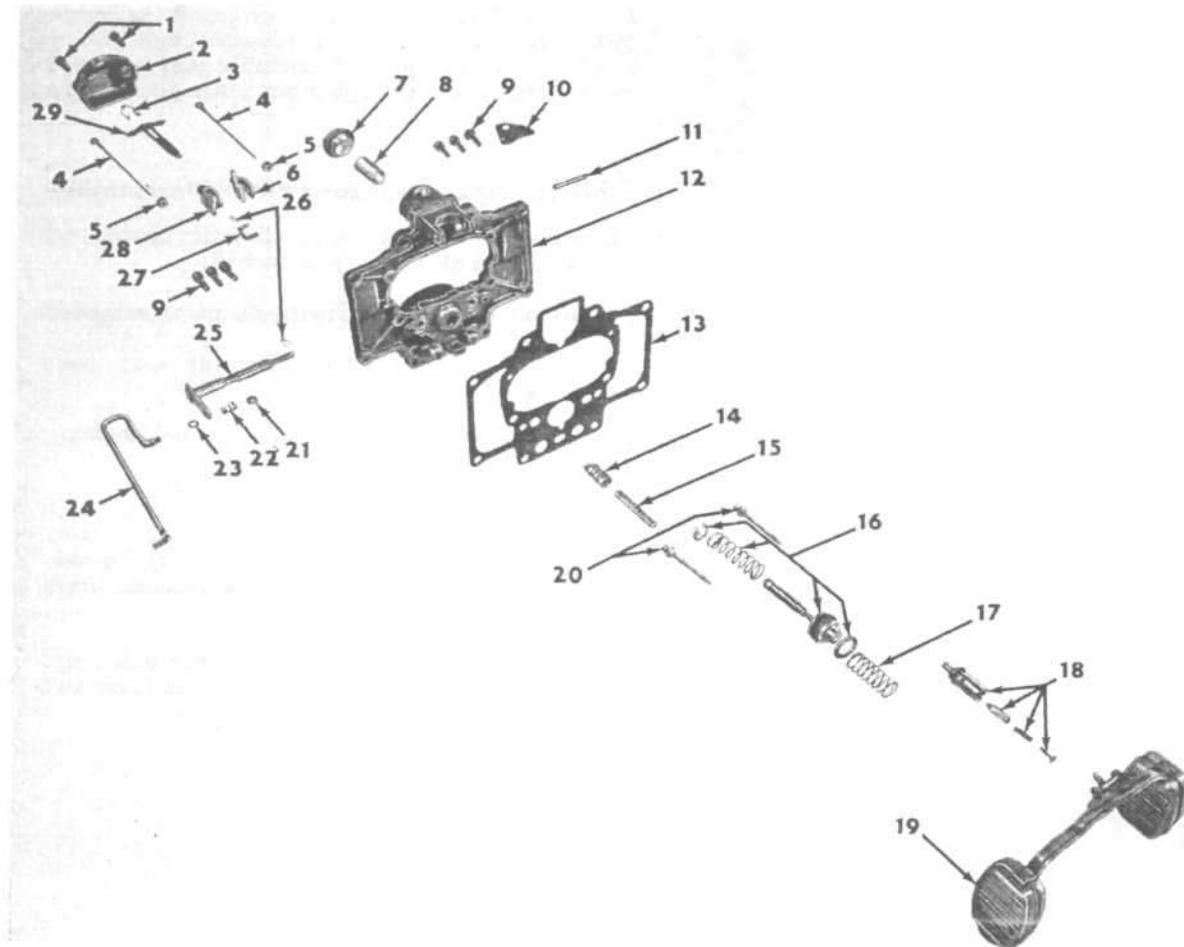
2204S CARBURETOR BOWL COVER AND ATTACHING PARTS
